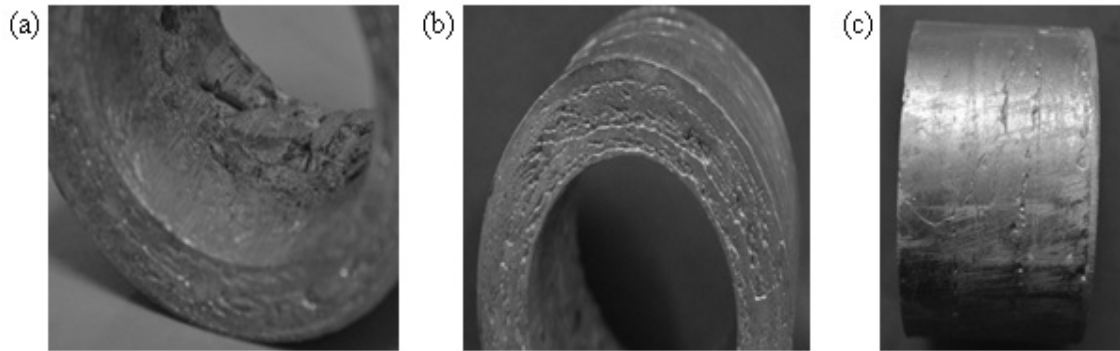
Physical properties of casting with temperature 690 °C. (a) Inner surface; (b) side surface; (c) outer surface.
